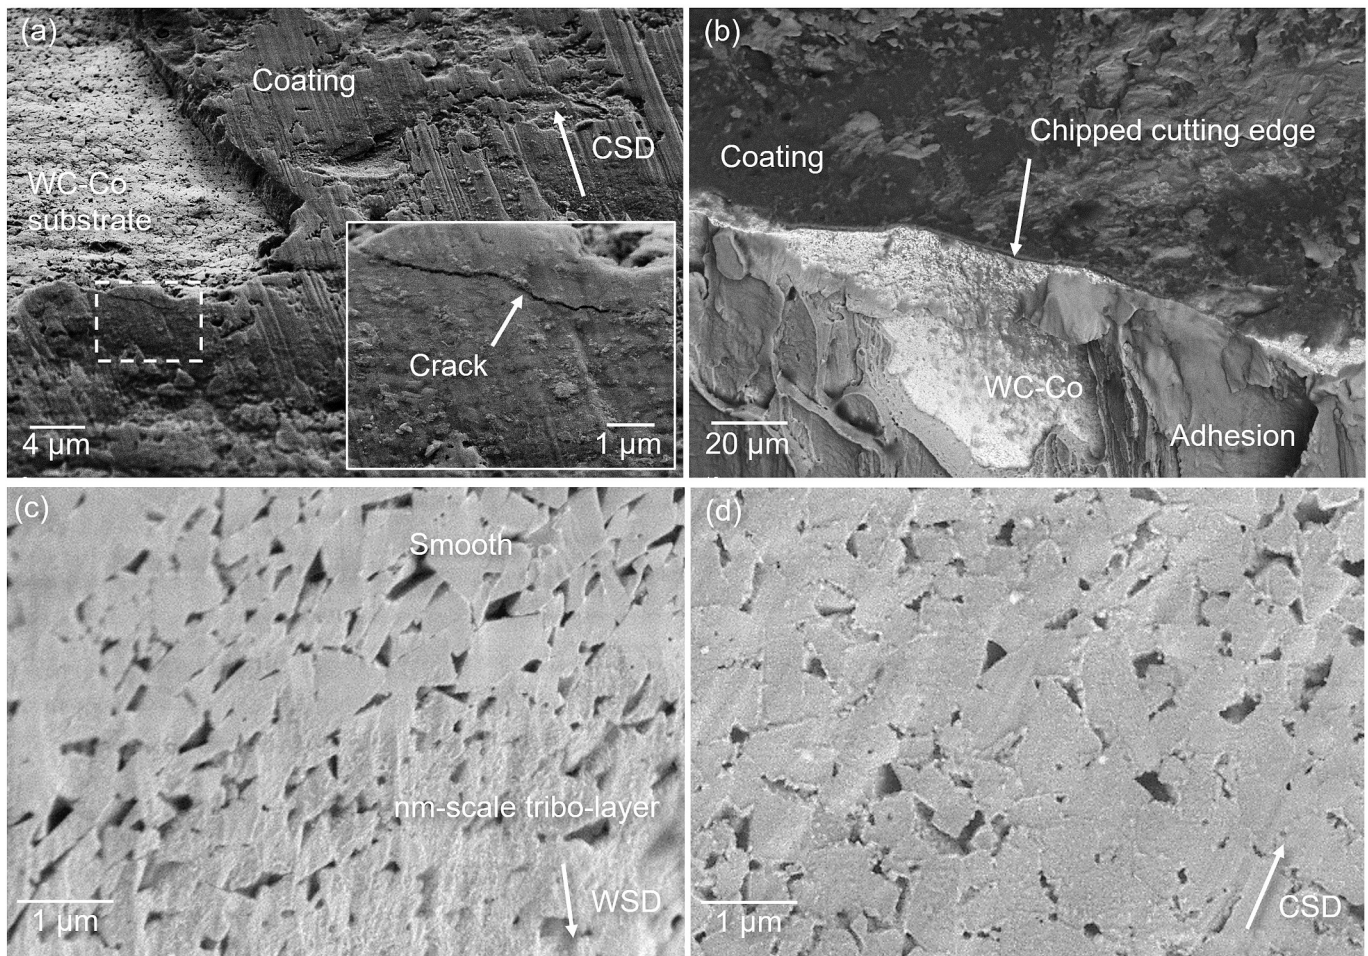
SEM micrographs exemplifying wear patterns on the tools. Cracking and chipping of tool coating on rake face after machining DED-LB workpiece under condition B (a); chipped cutting edge after machining wrought workpiece under condition B (b); WC grain topographies on flank face after machining wrought workpiece under condition A (c); WC grain topography on rake face after machining DED-LB workpiece under condition A (d). Chip and workpiece sliding directions (CSD and WSD) are indicated by arrows.
